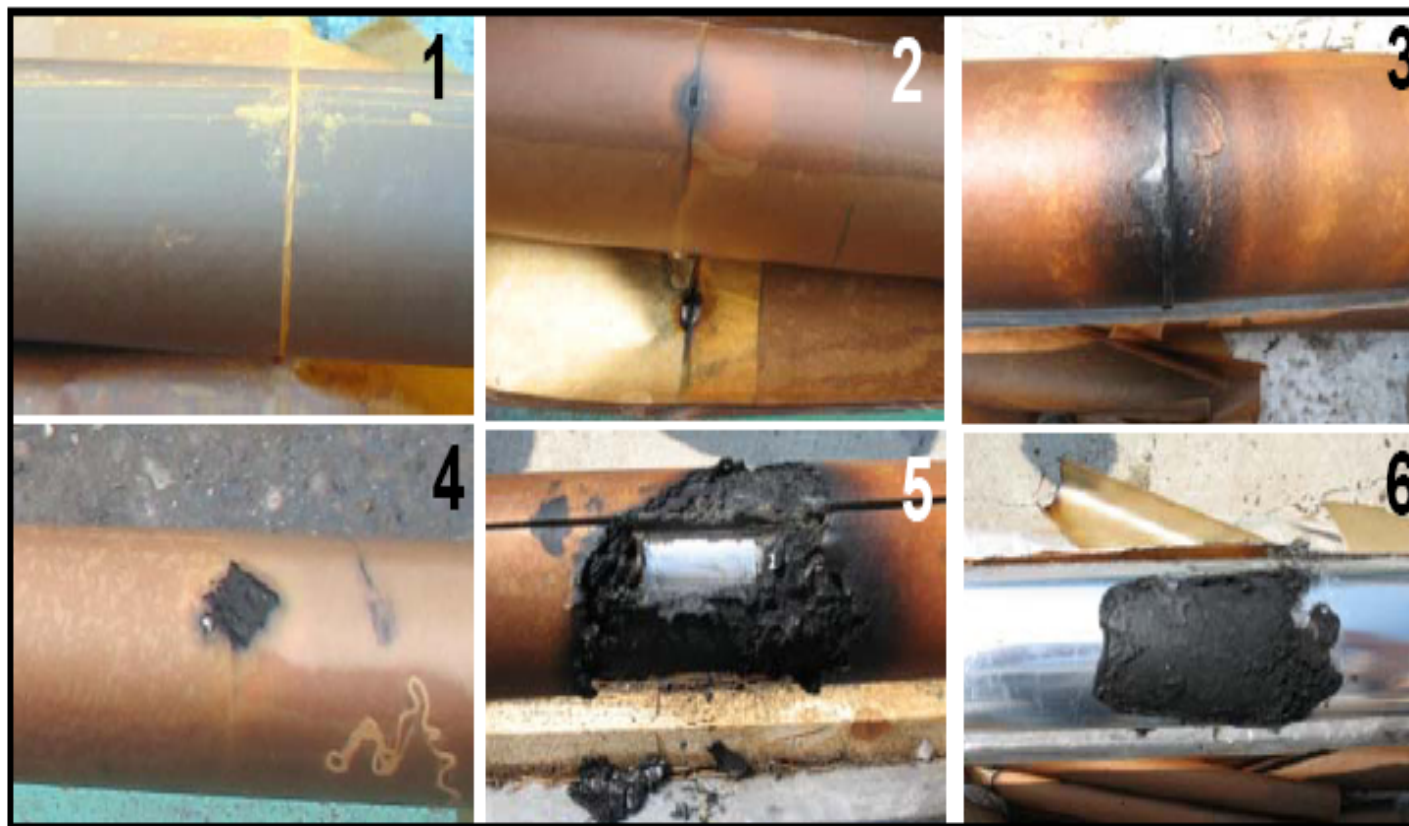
Defective 400 kV OIP bushing core. Sequentially unwound layers of paper reveal carbonized pocket at approximately 60% of the bushing core length (counting from the bottom).
